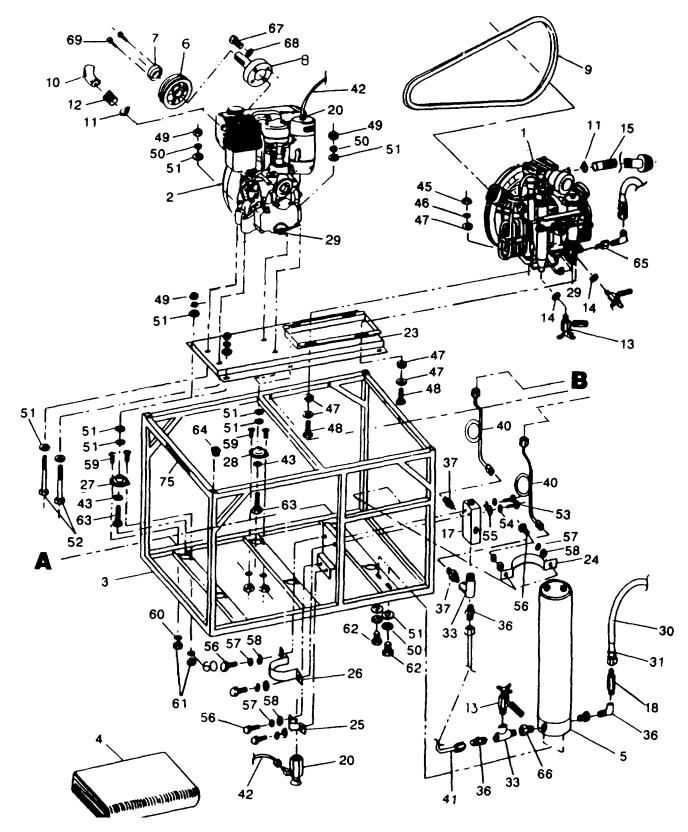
Air Compressor, Diesel Engine Driven (Sheet 1 of 2)
